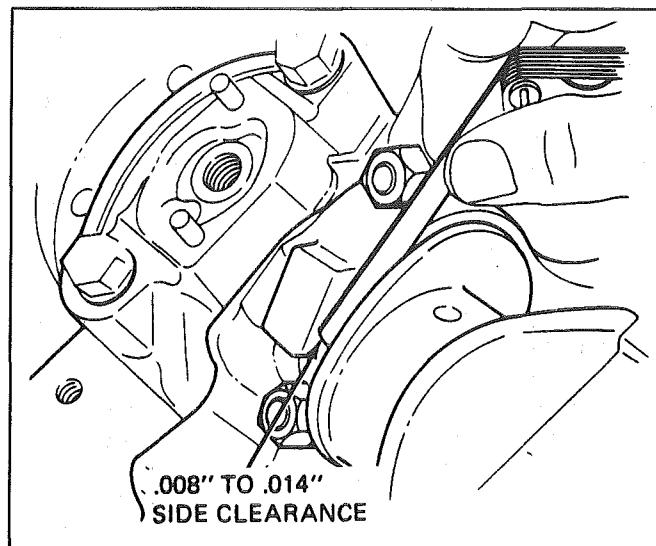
A3-37 Measuring Connecting Rod Side Clearance-Typical
